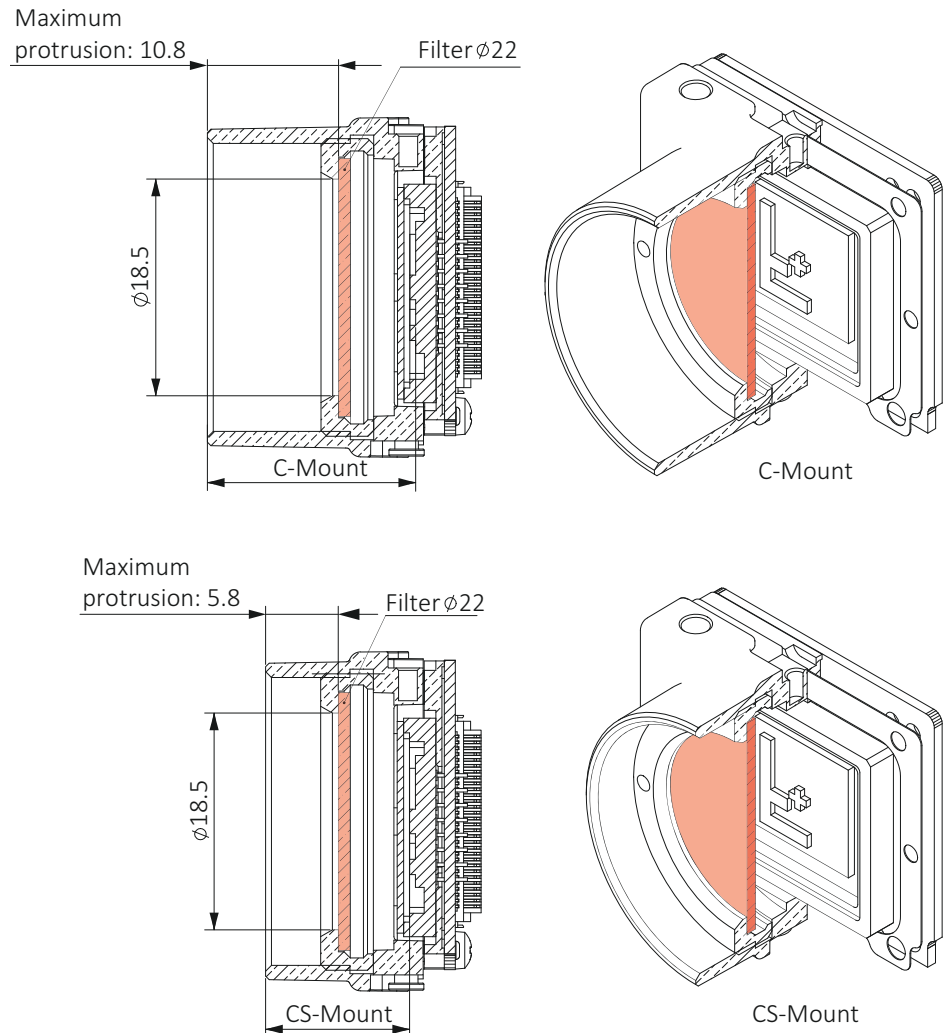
C-Mount and CS-Mount dimensions for Mako G models with a 22 mm filter
